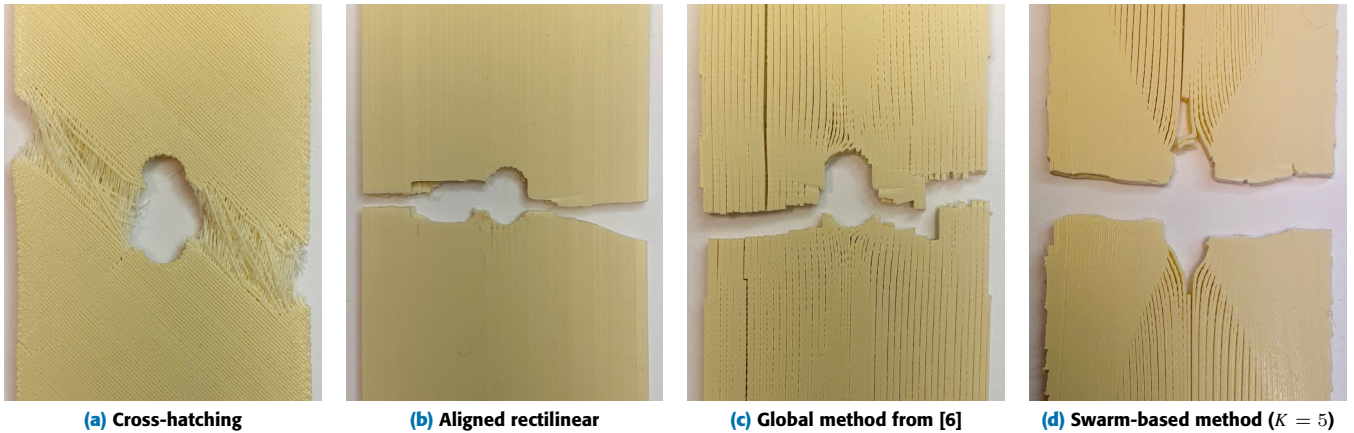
Open-hole tensile specimens after a correct failure during testing
